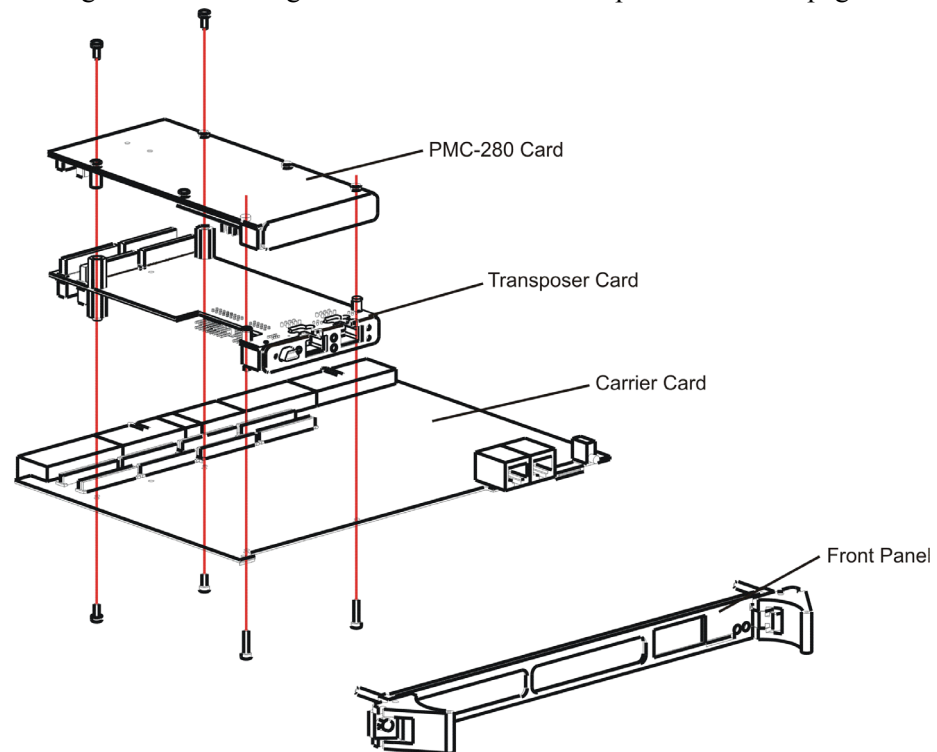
Installing PPMC-280 Card on Transposer Card
